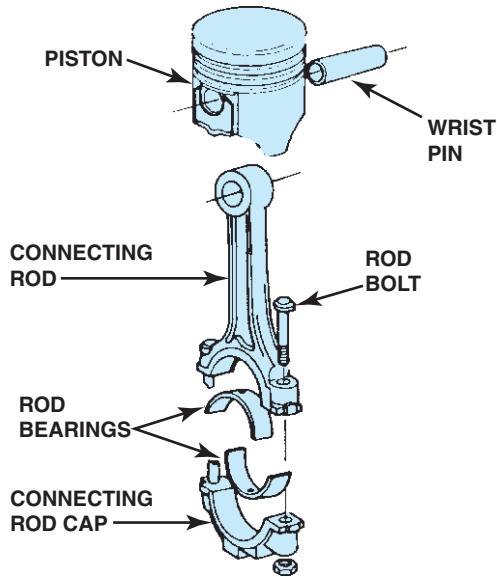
The connecting rod is the most highly stressed part of any engine because combustion pressure tries to compress it and piston inertia tries to pull it apart.
